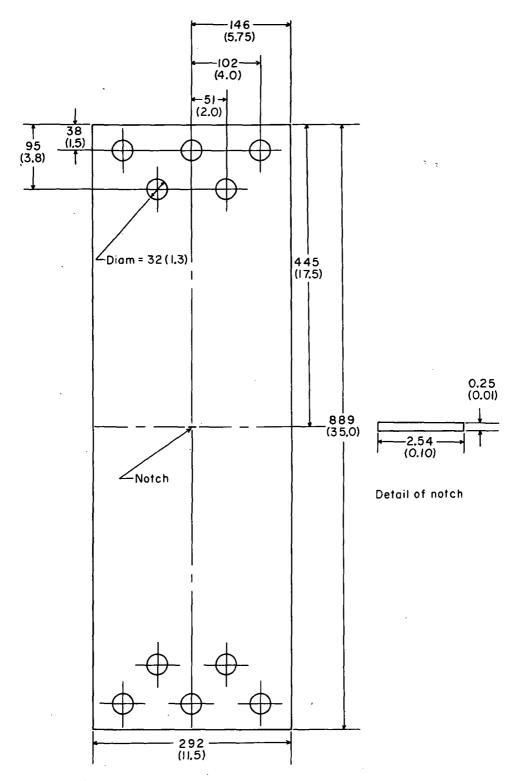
Specimen configuration. All dimensions in mm (in.).
